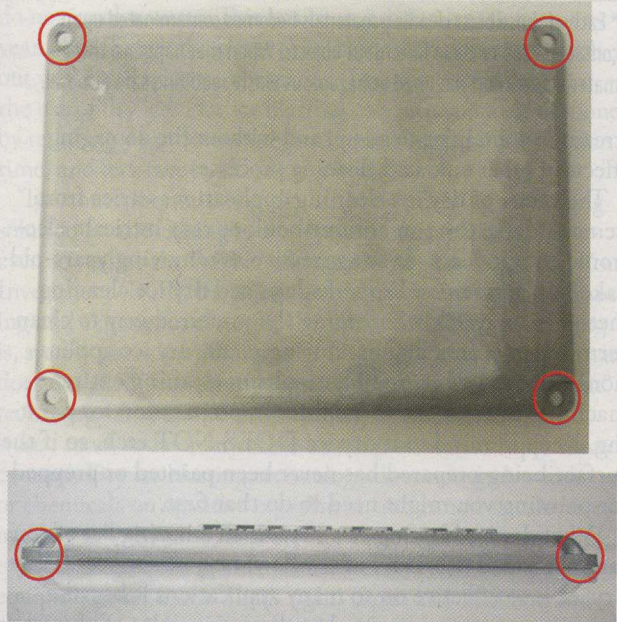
Top and side view of the cast part (courtesy of Littler Diecast Corporation).
